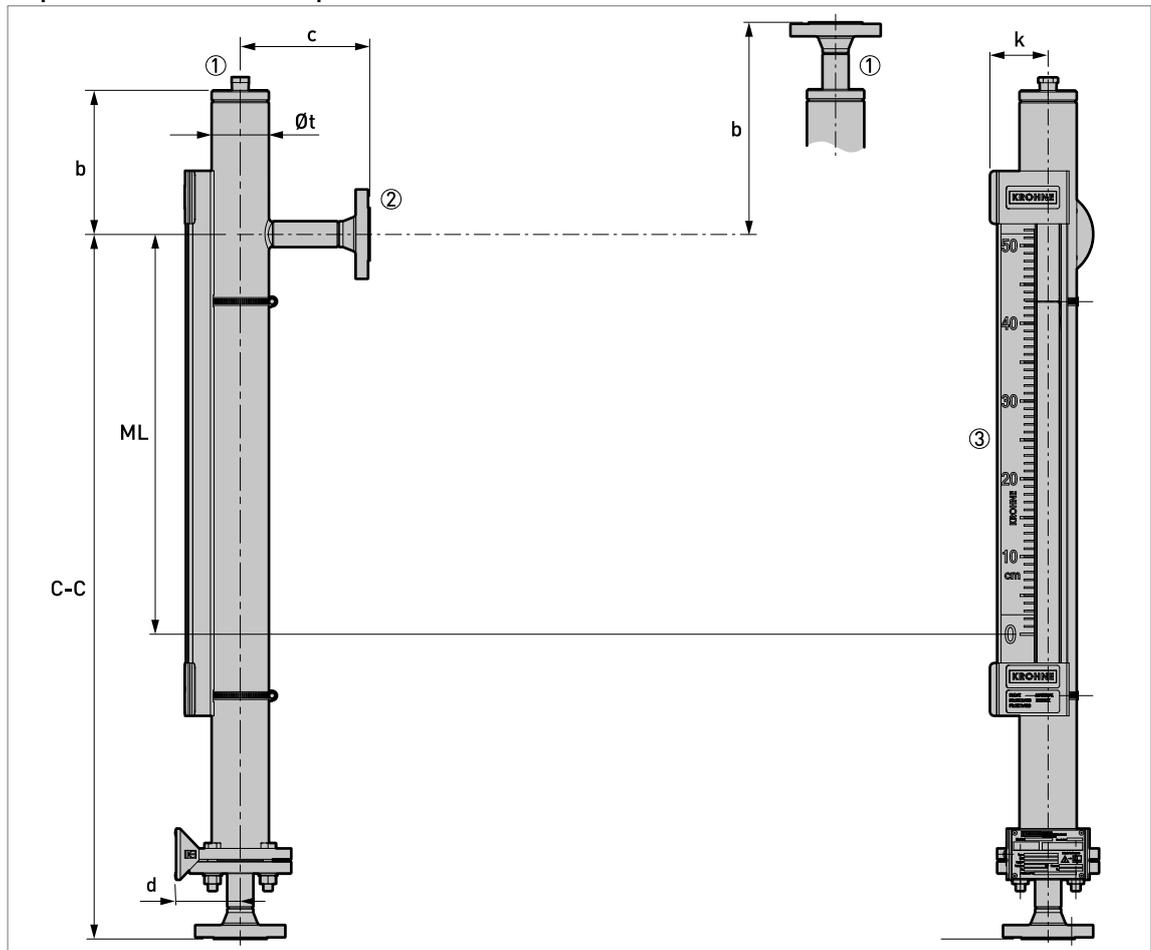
BM26A-6000: top side - bottom axial process connections
